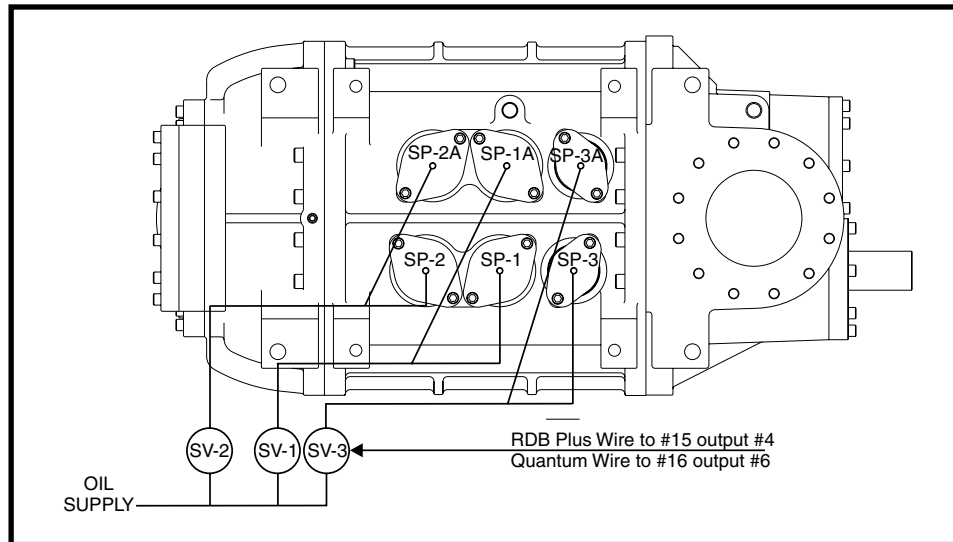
TDSL 283XL 4-Step P & I Diagram with 4-Step Machine (bottom view)
